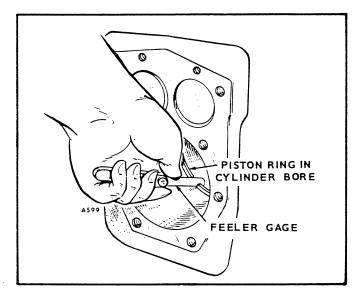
FITTING PISTON RINGS TO THE CYLINDER
